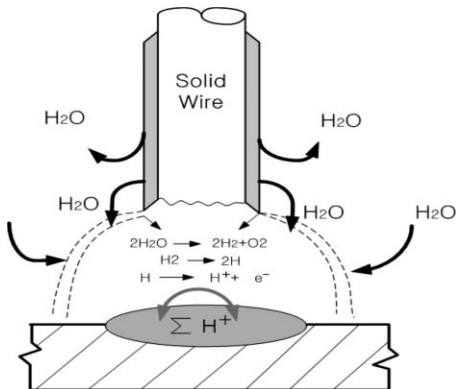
Hydrogen penetration in the weld metal.<sup>[4]</sup>
